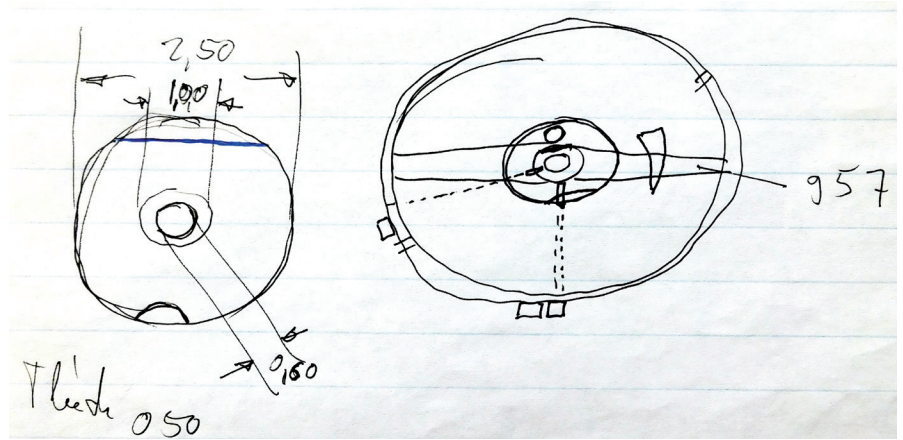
Drawing of the banking disk, and the arrangement of the unlocking pin and impulse jewel.
